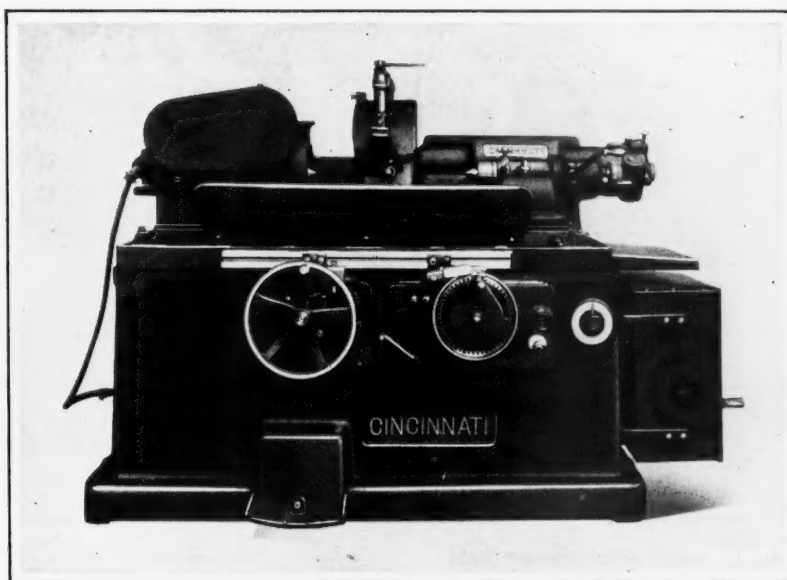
Cincinnati Wide-wheel Plunge-cut Grinding Machine
